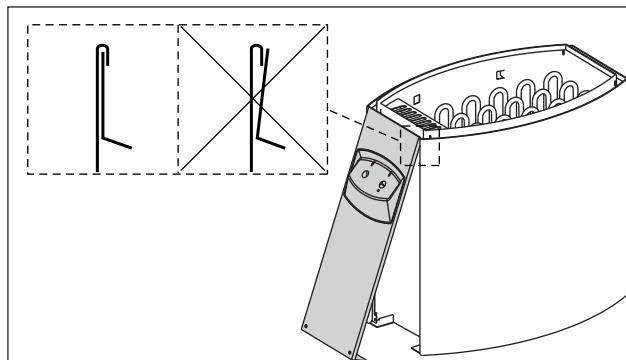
Closing the cover of the connection box (all dimensions in millimeters)
